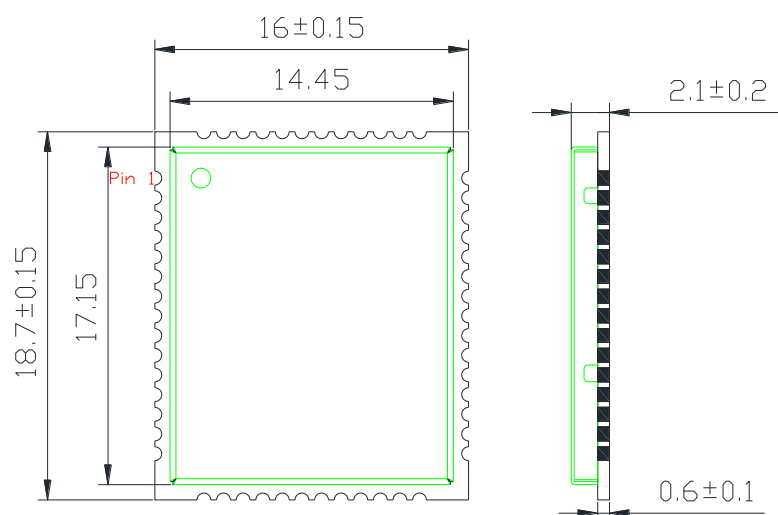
MC65-OpenCPU Top and Side Dimensions (Unit: mm)
